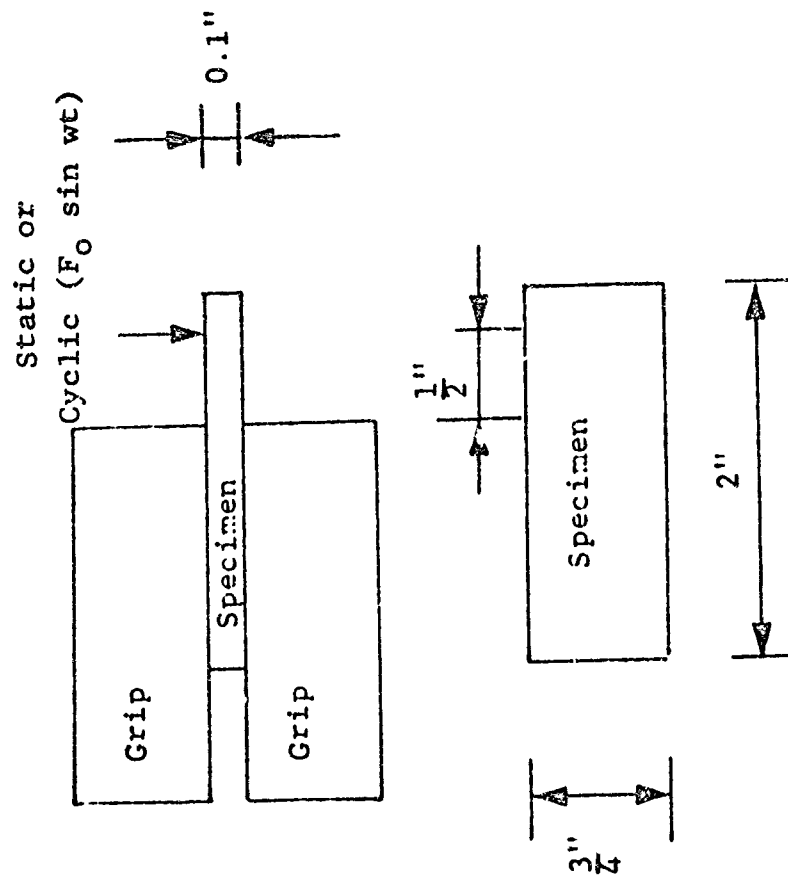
CANTILEVER BEAM SPECIMENS AND METHOD OF LOADING
